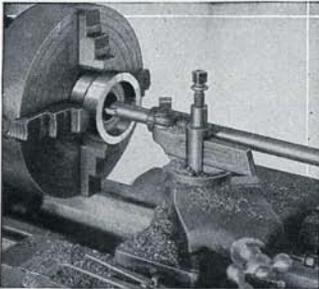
Making a Large Bushing Held in a Four-jaw Chuck
